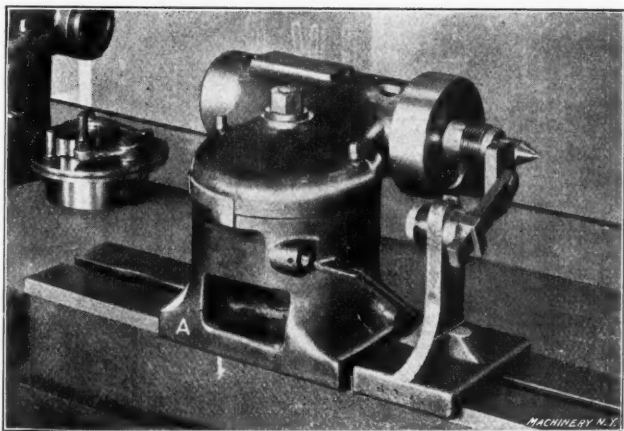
Testing Parallelism of Spindle with Locating Projection in Front
